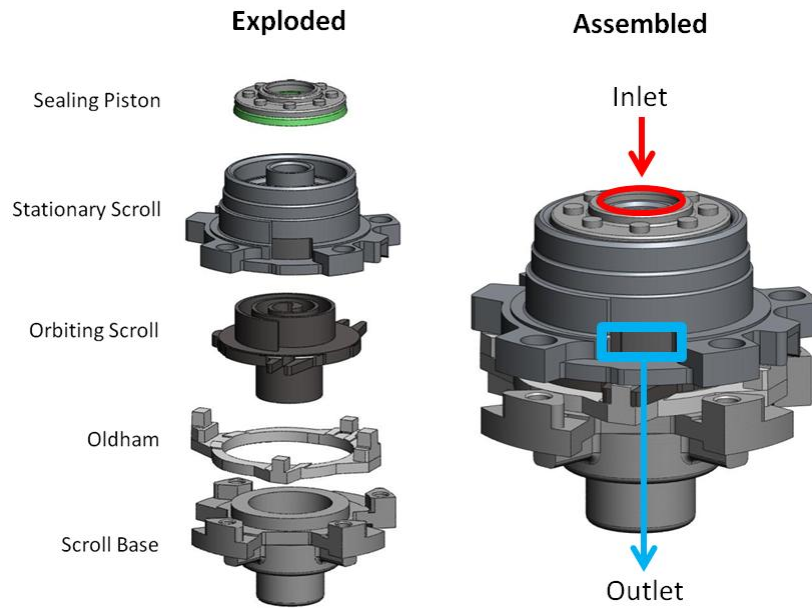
Scroll compressor exploded (left) and assembled (right) views.
